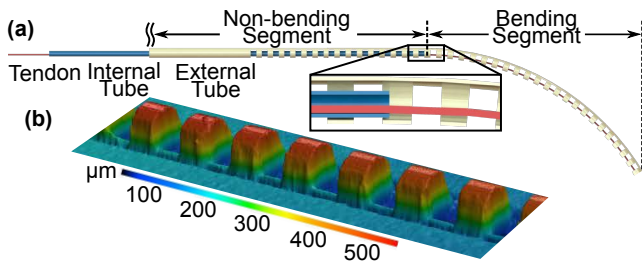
(a) Modified COAST Guidewire assembly, (inset) Cross-sectional view showing internal structure of the components with an actuated tendon; (b) 3D laser-scanned profile of the external tube.
